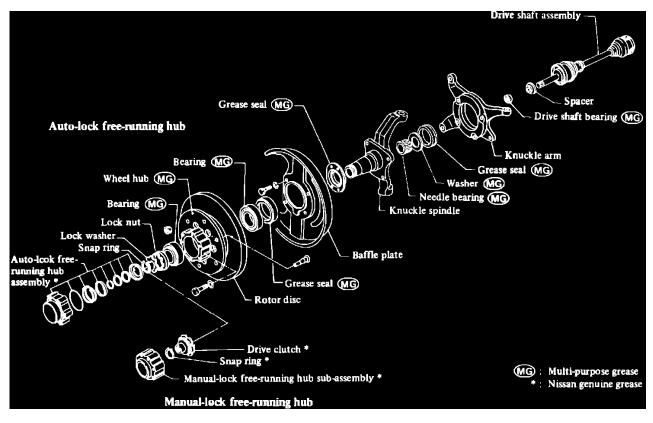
Front axle exploded view. 1985-86 4WD Pickup
